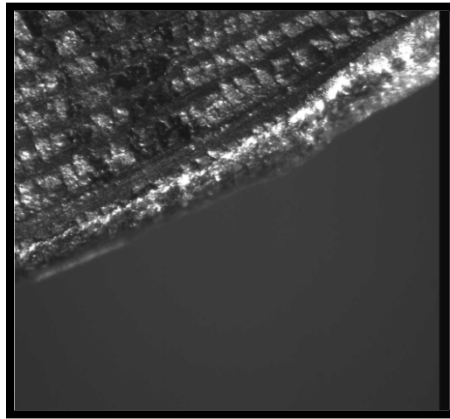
Cold Rolling of Roller Wheel Edge.
